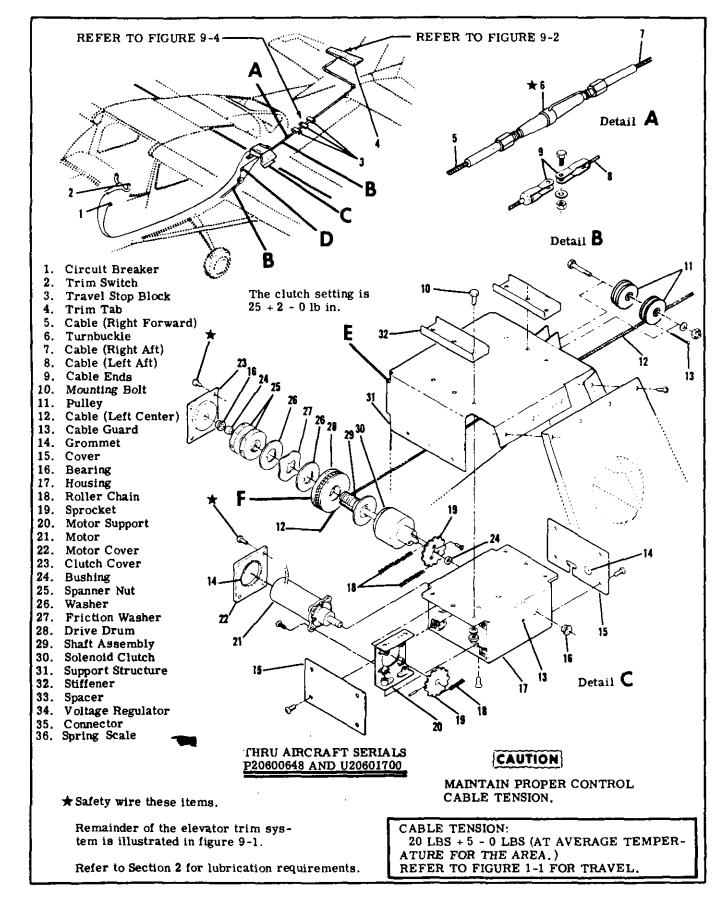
Electric Elevator Trim System thru P20600648 & U20601700 (Sheet 1 of 2)
